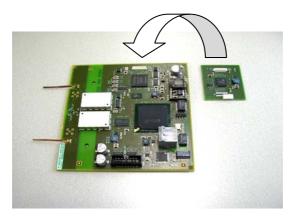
Mounting the G.729 Daughter Board onto the Main board.
